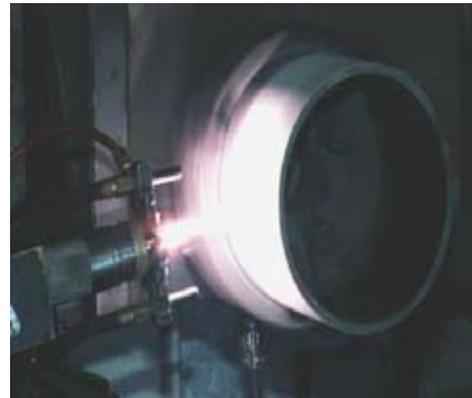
Plasma spray gun coating a cylindrical part [16]
